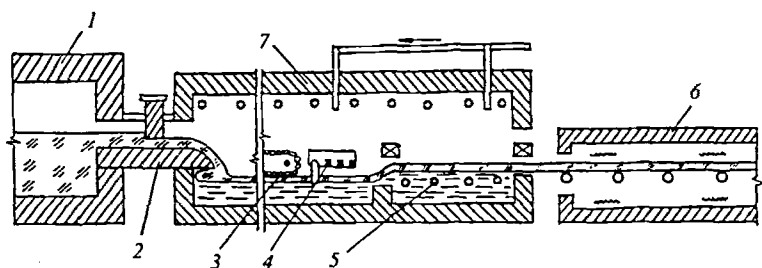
Diagram of two-stage shaping of a glass ribbon on the surface of molten tin: 1) glass melting furnace; 2) overflow channel; 3) spread-limiting mechanism; 4) electromagnetic inductors; 5) coolers; 6) annealing furnace; 7) molten pool.
